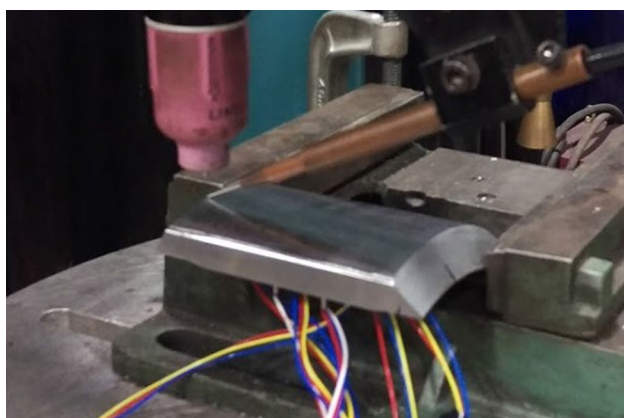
The welding setup including the section of pipe used with thermocouples implanted into the bottom surface.
